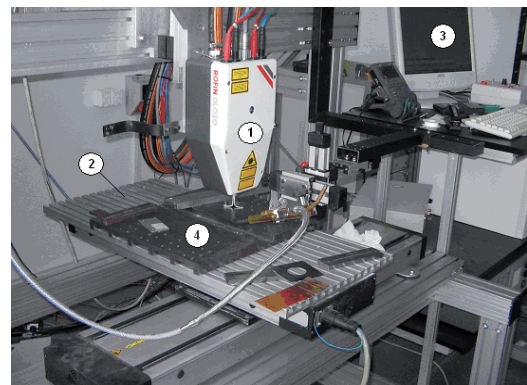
A view of HPDL welding stand equipped with 1 – laser's head, 2 – ISEL AUTMATION CNC table, 3 – computer control, 4 – steel plate
